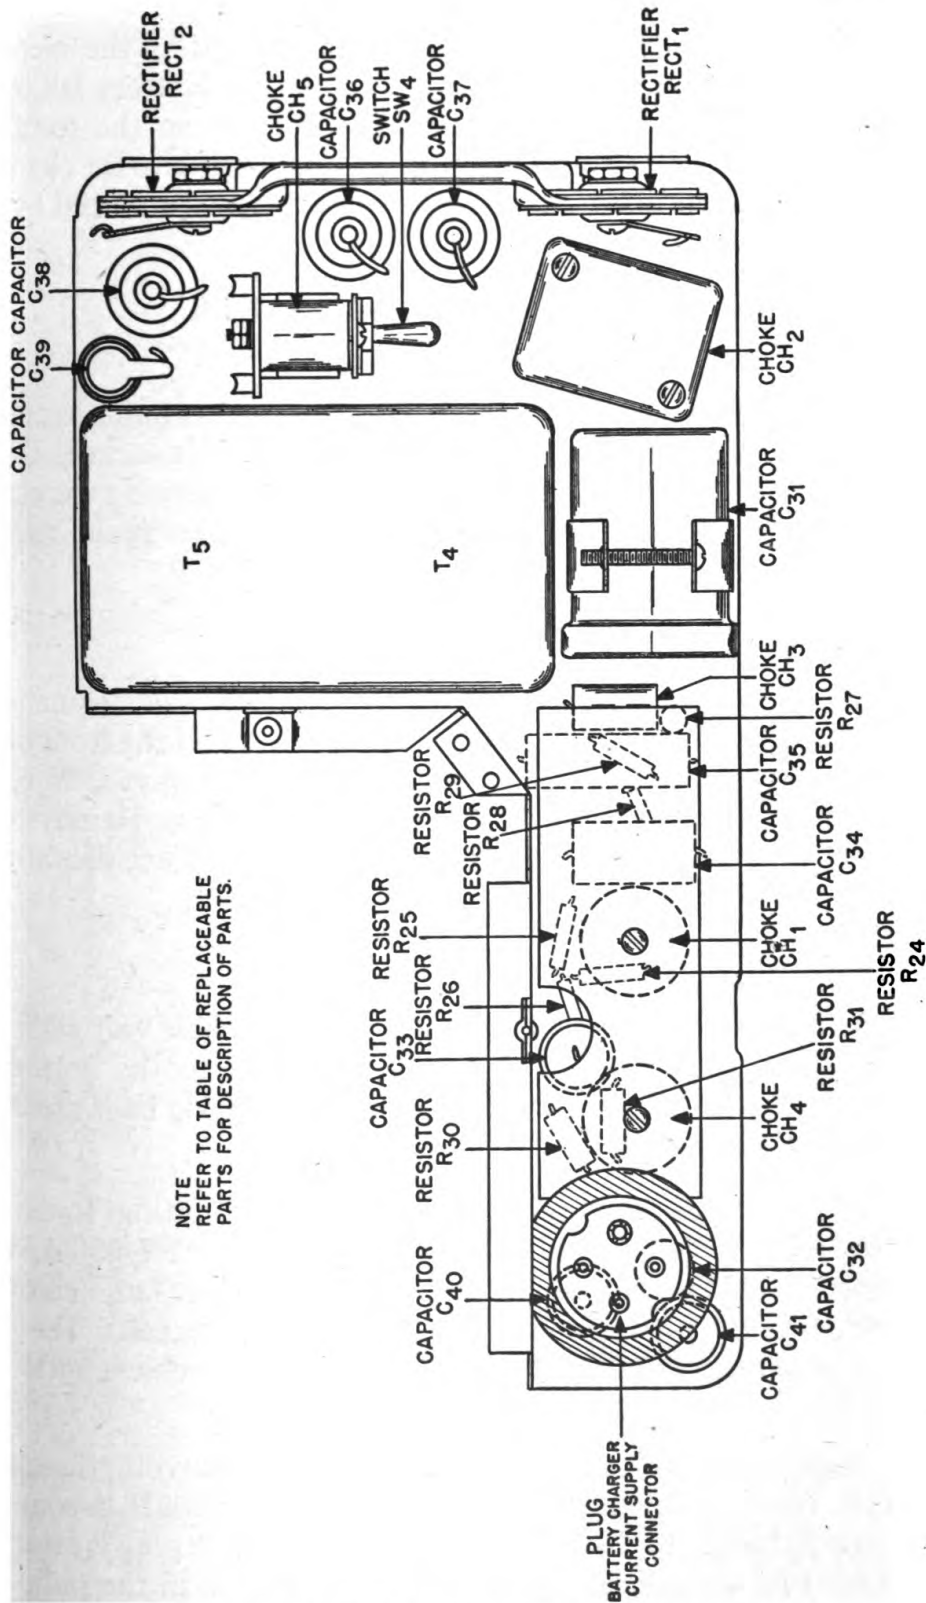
RADIO RECEIVER BC-728-A, POWER SUPPLY—BOTTOM VIEW—SHOWING MAJOR PARTS
